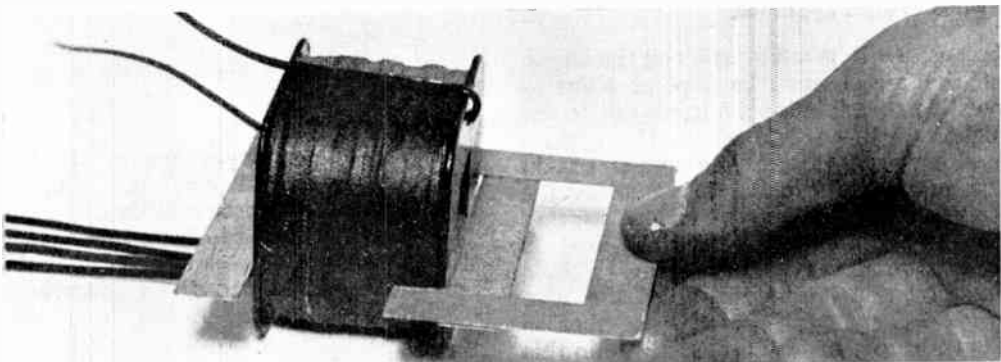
ASSEMBLING THE STAMPINGS. SECOND STAGE.
